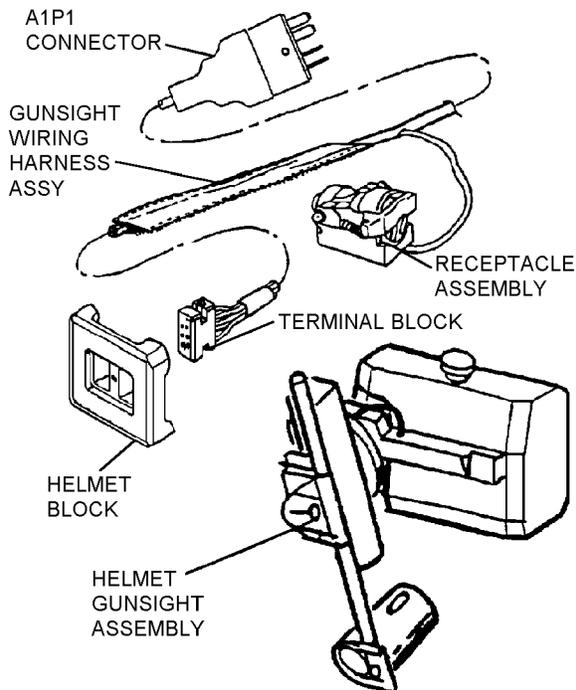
Helmet Sight Assembly Components (HGU-67/P)
